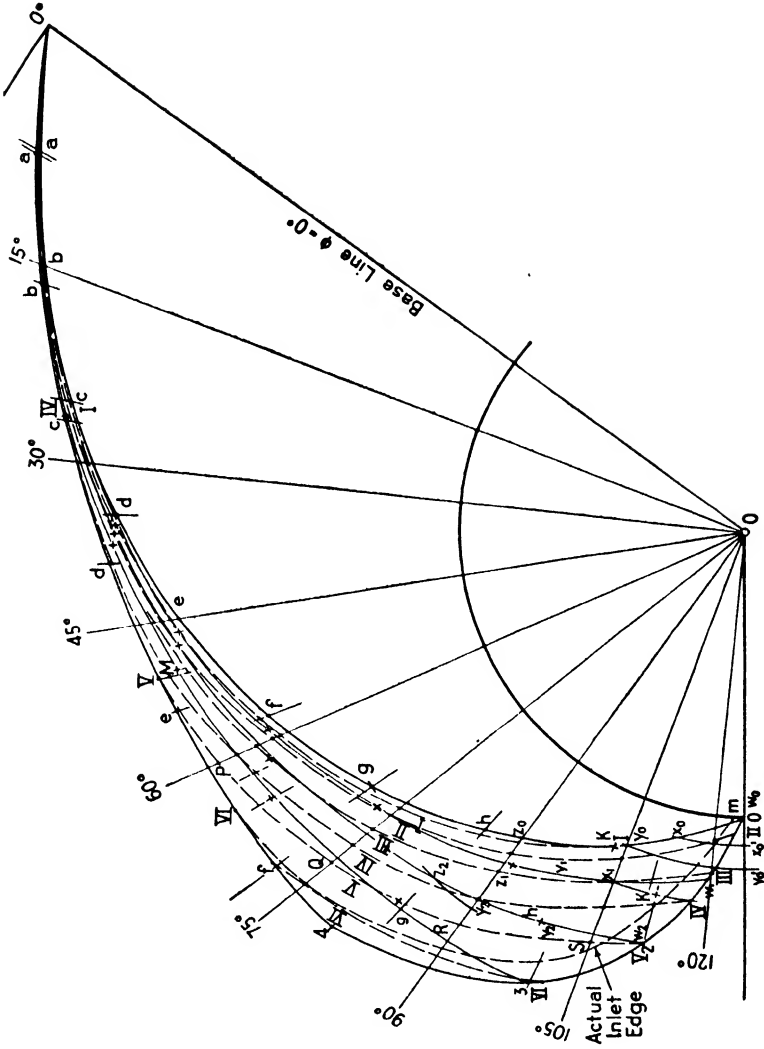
End view of impeller. Pattern maker's sections shown.
